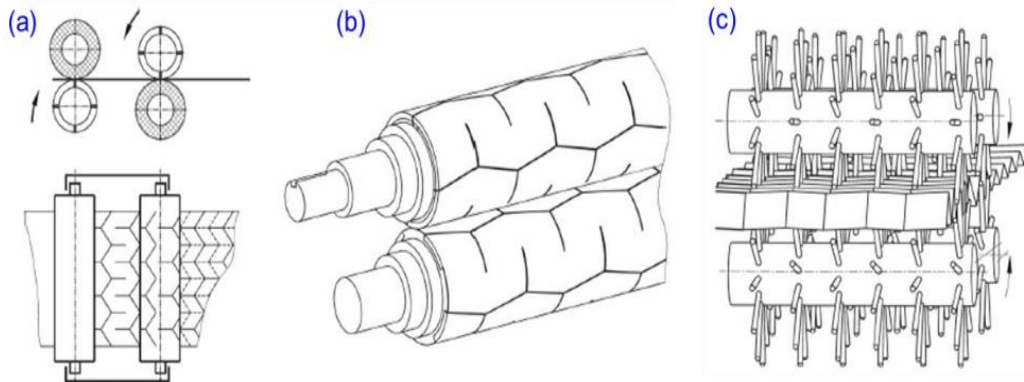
a) Cuts are made to both sides of the sheet material with two sets of cutting rollers. b) Pair of cutting rollers c) Pair of porcupine rollers folding sheet material (Zakirov et al. 2006, 2010)
